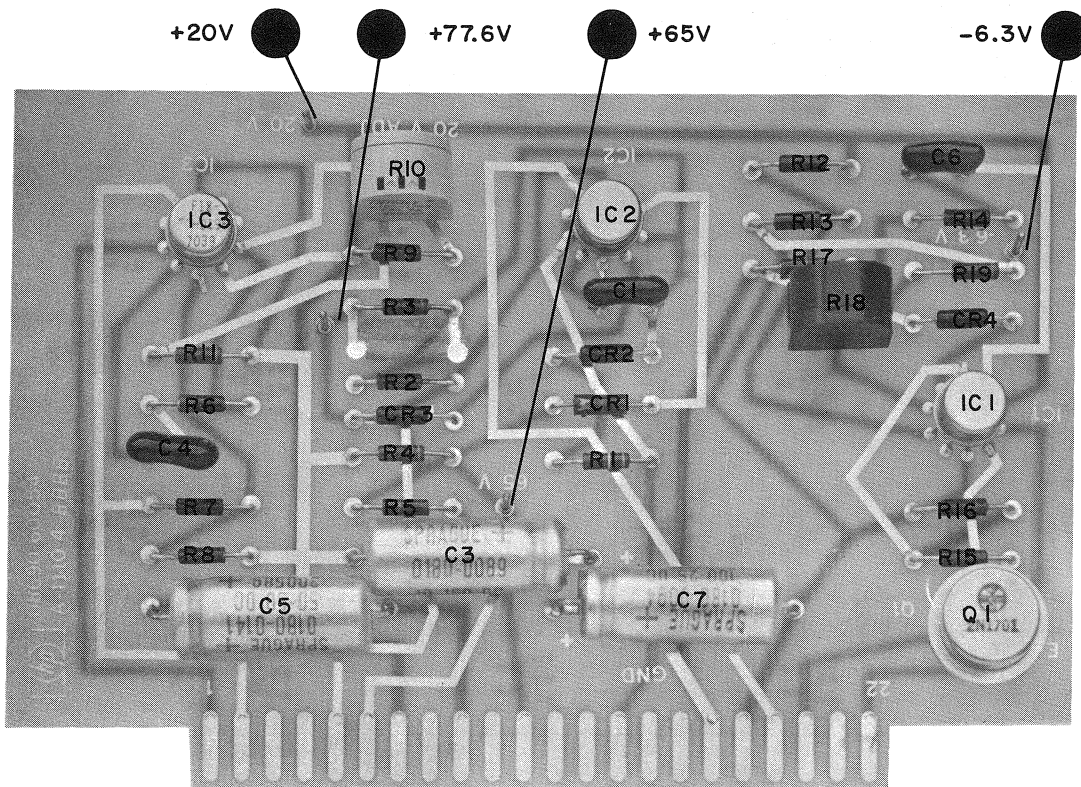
Component Identification, A14 Assembly (Part of Change 12)
